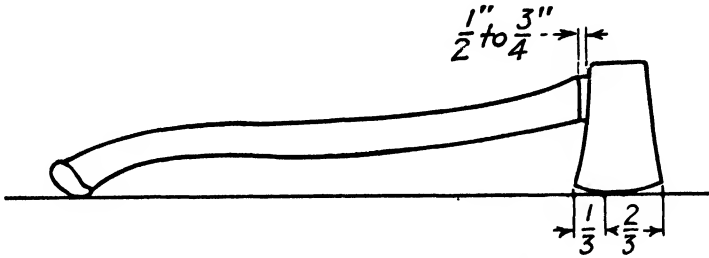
The handle should be fitted so that a straight line from the end of the handle tangent to the cutting edge of the ax head will touch the edge at a point about two-thirds of its length from the outer end.
